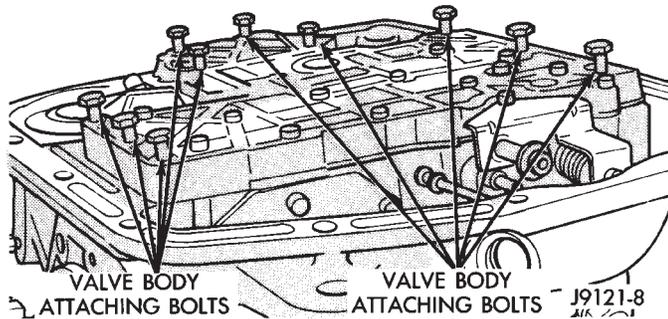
Valve Body Attaching Bolt Locations (Typical)
